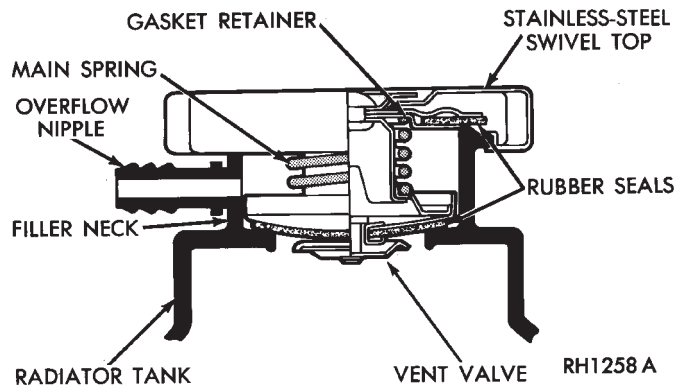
Radiator Pressure Cap and Filler Neck—Typical
